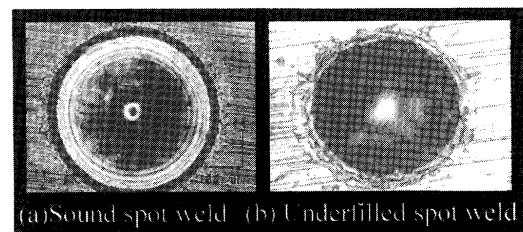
Surface of spot weld fusion zones in copper sheets after laser welding, showing sound and underfilled welds.
